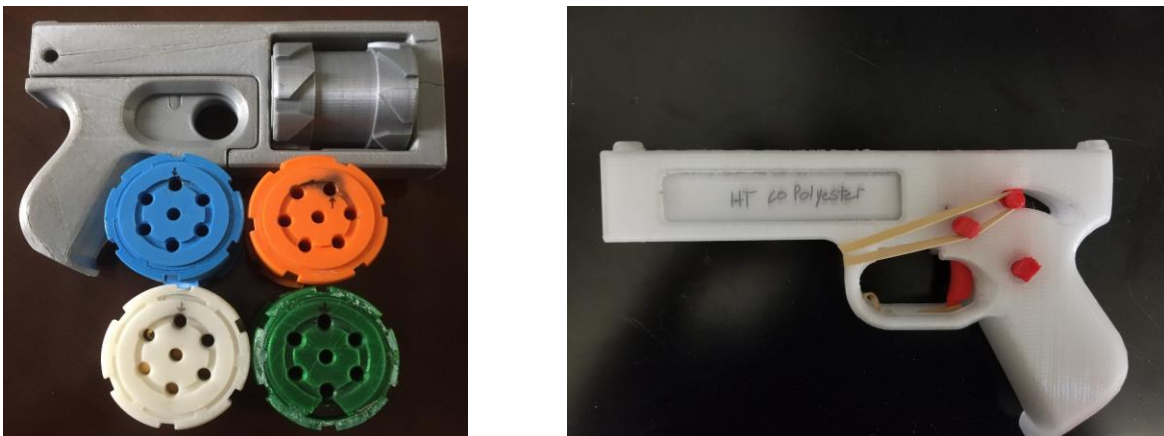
Revolver style (left) and pistol style (right) .22 caliber polymer firearms
